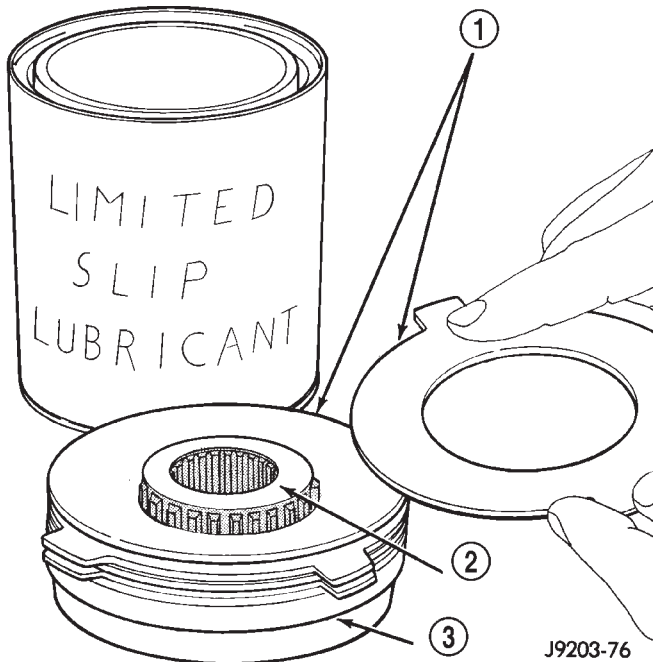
CLUTCH PACK PRE-LUBRICATION
